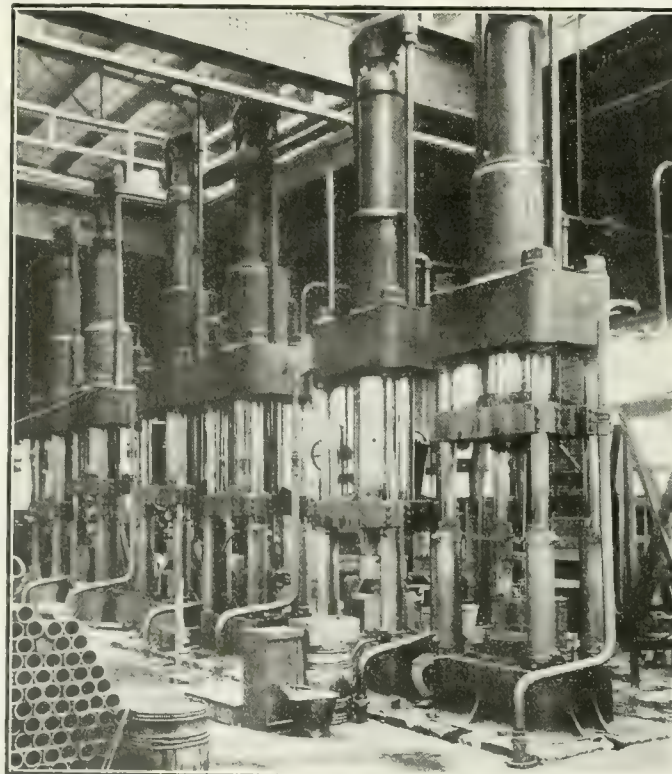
THREE EACH, 250-TON "BOOMER & BOSCHERT" PIERCING AND DRAWING PRESSES.
